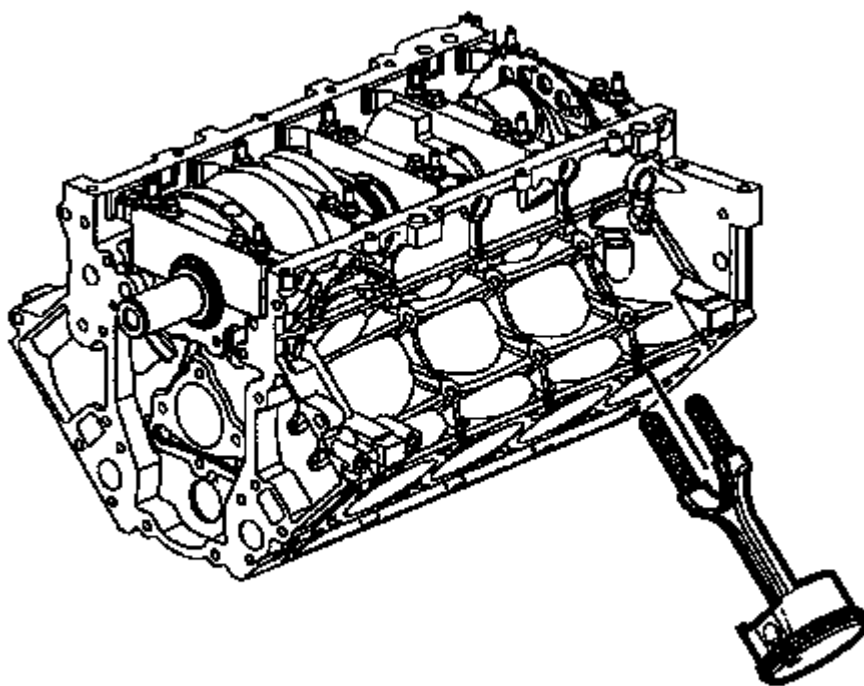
Piston, Connecting Rod & Cylinder Bore
